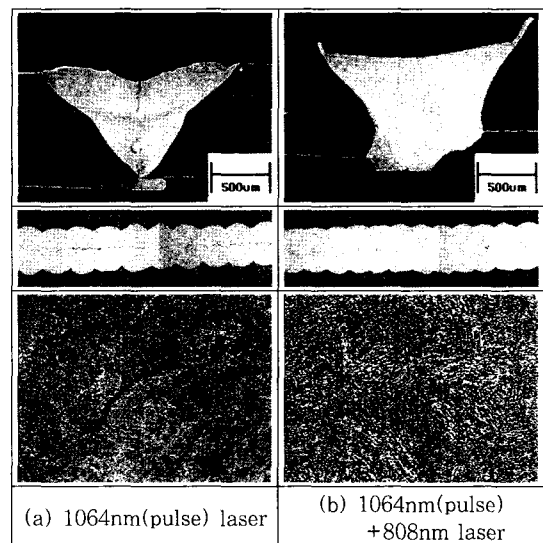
The shapes of A5052 weldment surface, cross section & center structure
